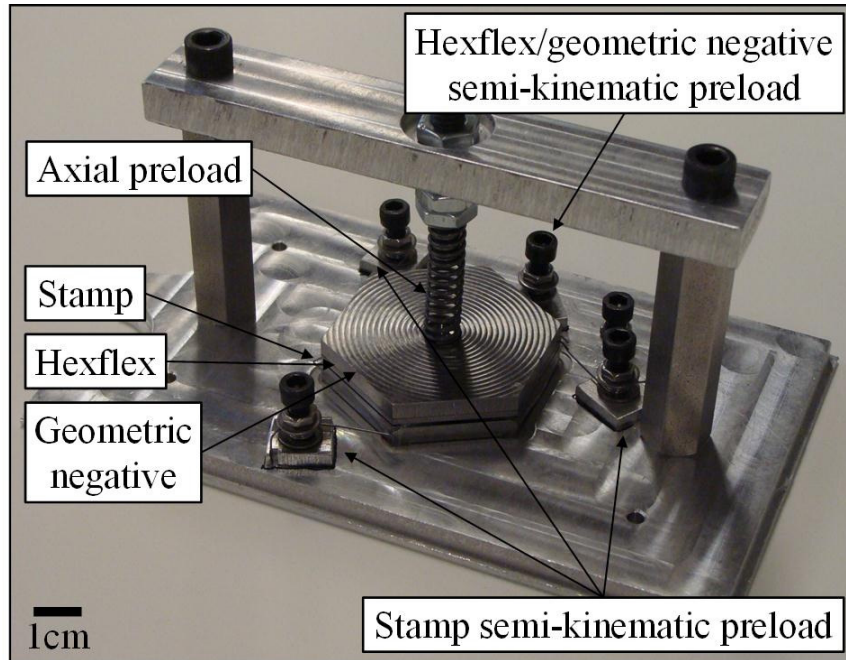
Fabricated transfer fixture setup. The preload mechanisms surround the fixture stack. This fixture is also used for aligning the Hexflex and shadowmask in deposition. The top axial preload is removed for the deposition operation.
